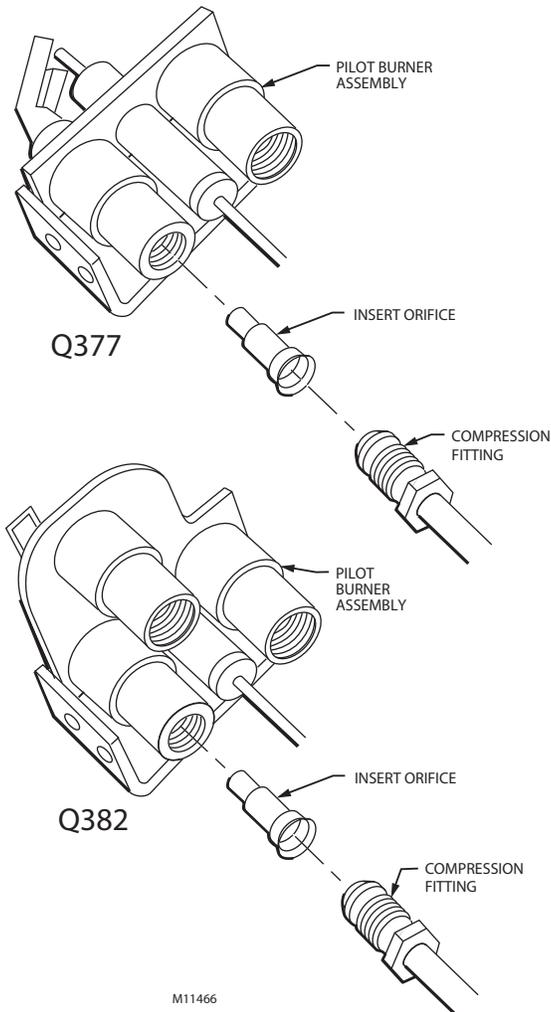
Changing insert orifices (Q377 and Q382 shown)
